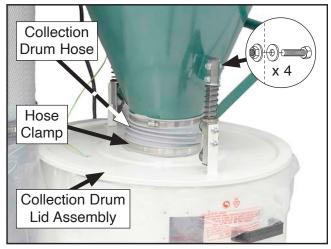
Lock handle guide assemblies installed on collection drum lid.
